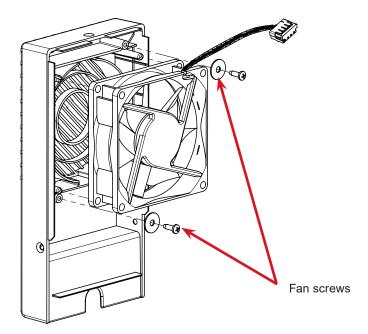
4kW/4.6kW Rectifier Fan Removal
